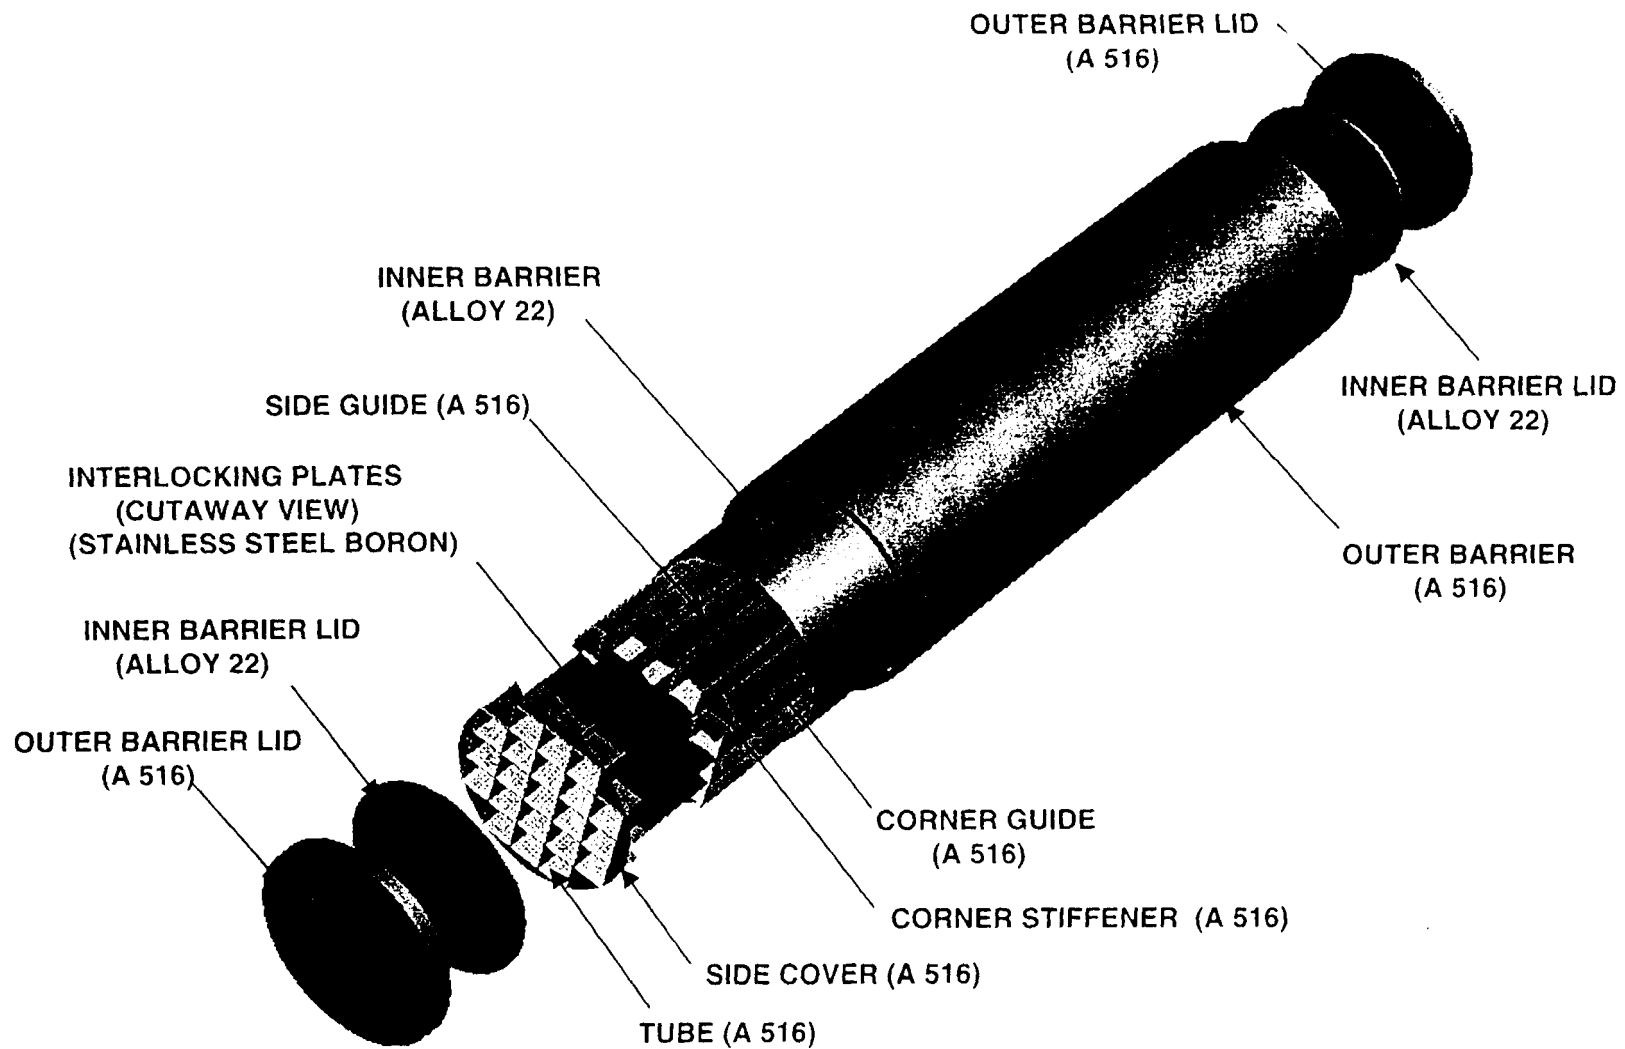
Waste Package for 21 PWR Uncanistered Fuel Assemblies
